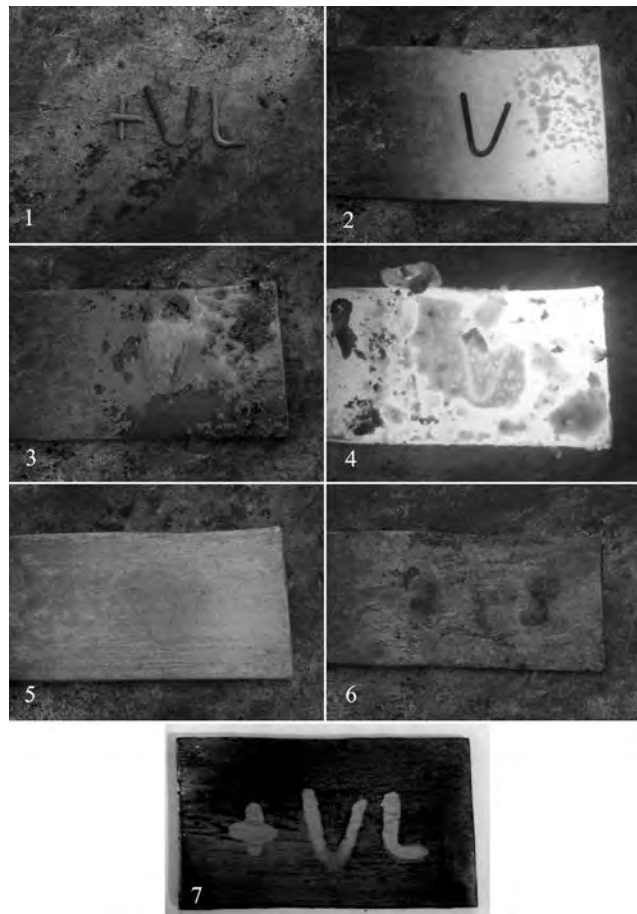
Phases of welding iron letters on a trial piece simulating a sword blade: 1. Letters +VL formed from iron wire, 2. A cold letter is placed on the steel plate, 3. Molten borax sand on heated steel plate and letter, 4. The plate is heated into welding temperature, 5. Letter V forge-welded by hammering, 6. Letters +VL welded on the plate, 7. Coarsely ground and etched steel plate with iron letters on its surface. Photos by Ulla Moilanen.
